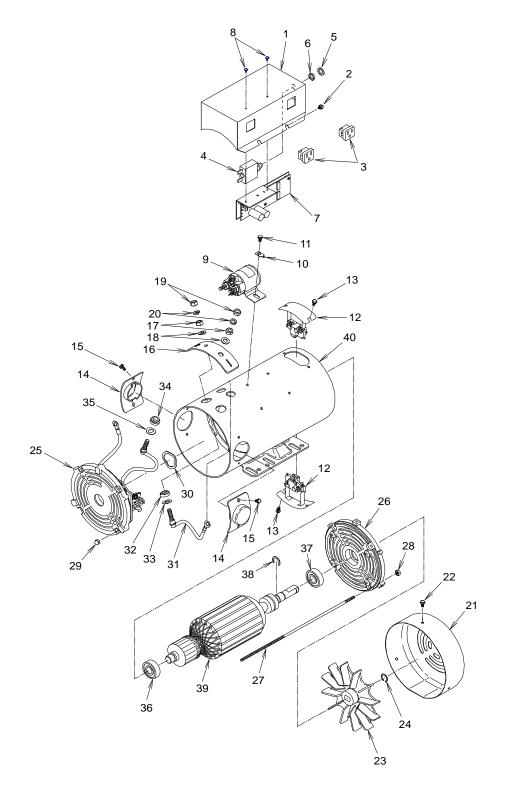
24-Volt Large Frame Generator, Current Version
